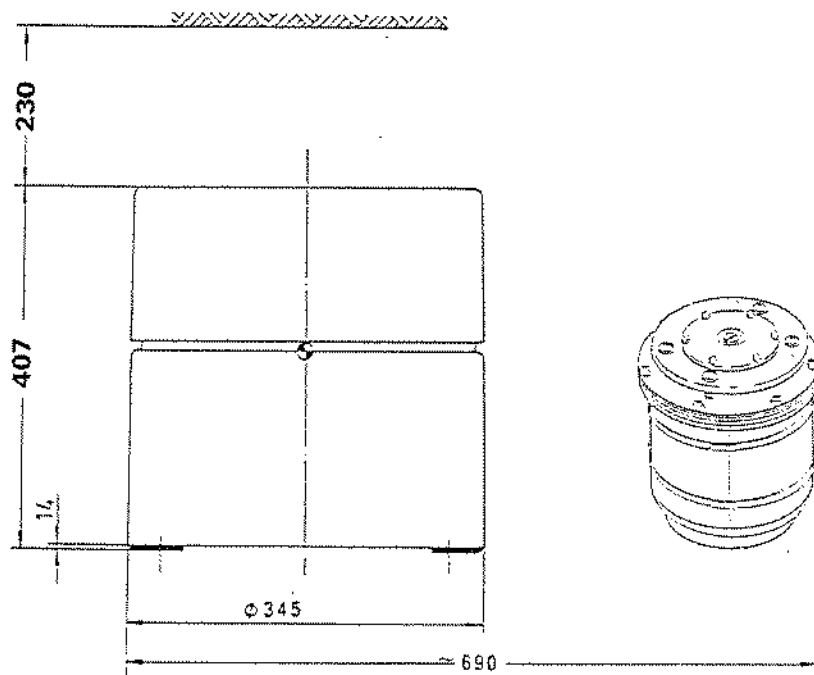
Dimensional Drawing of Clearance required for the Gyro Compass
